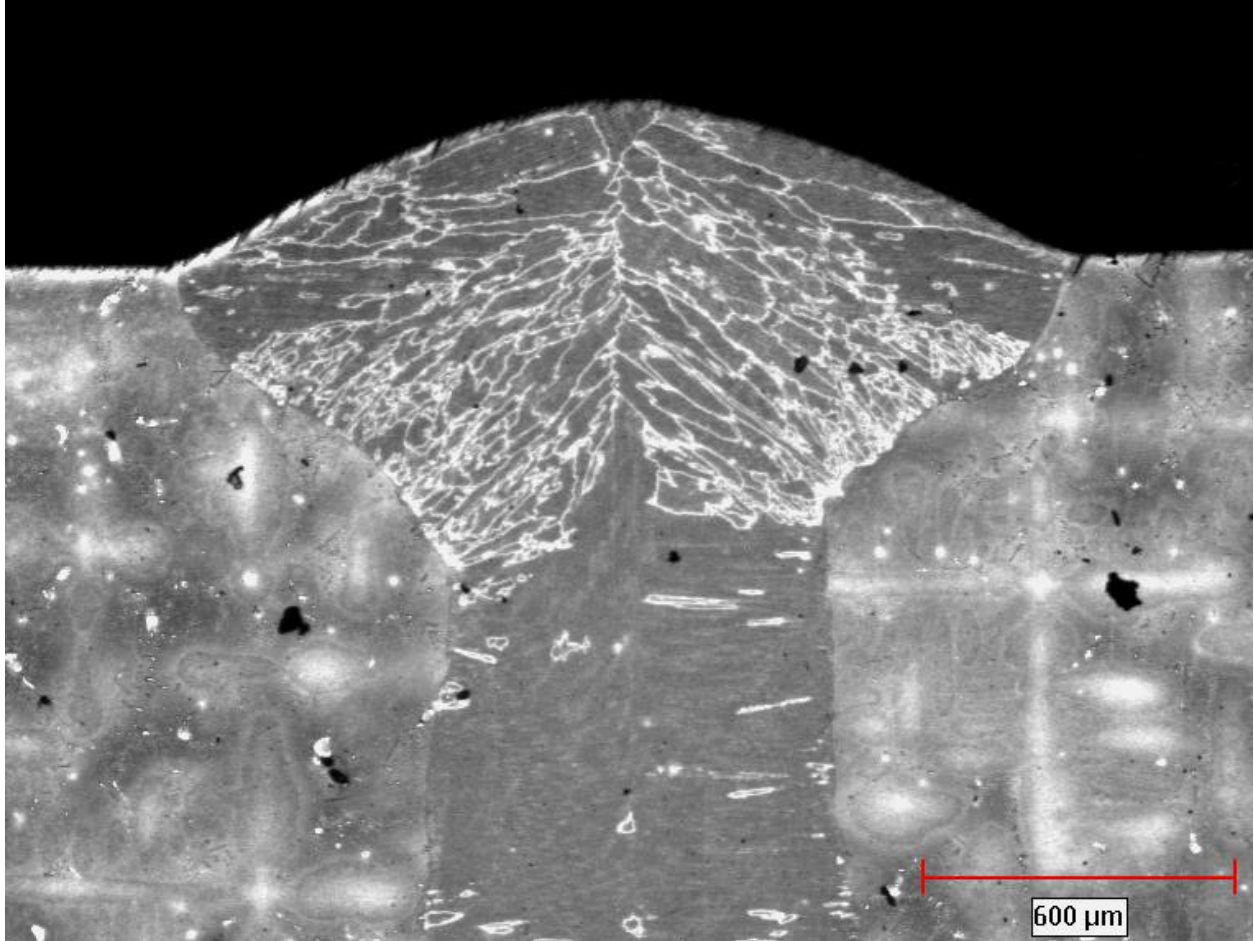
Weld profile of PWHTed SC IN-738 LC
